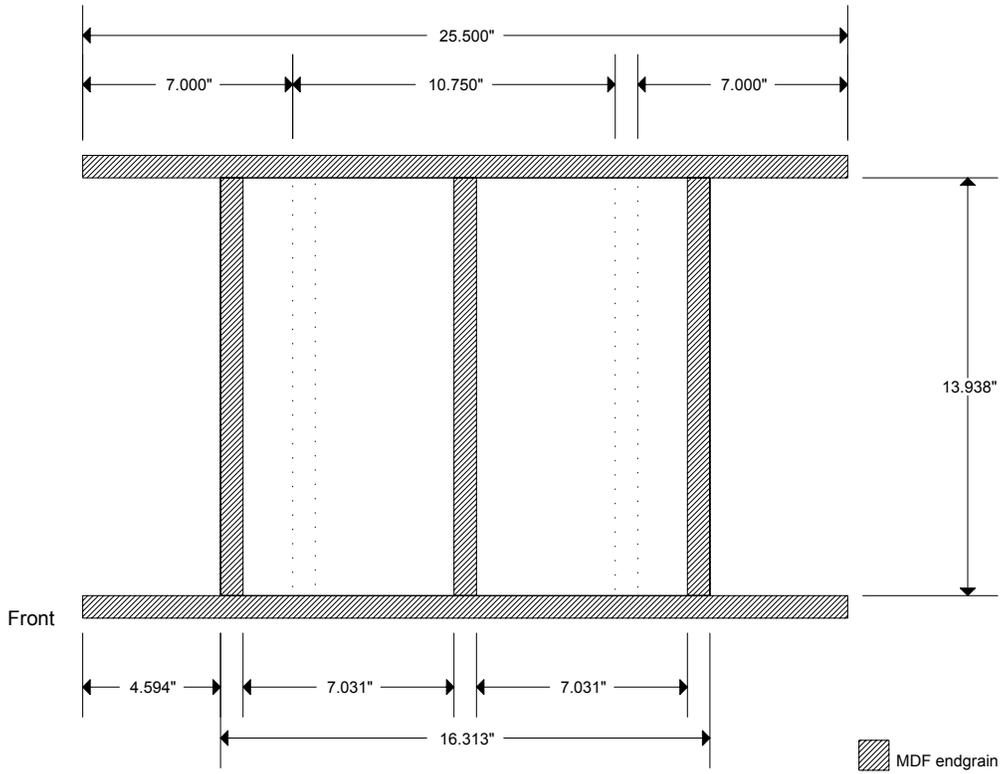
Mirror box, side view. The beamsplitters and mirrors rest on 10-32×3/8-inch socket screws that are threaded into 3/16-inch holes drilled into the MDF. The periscope assembly and the brackets that hold the T221 flat panel in place are omitted.
